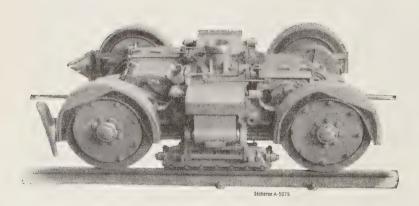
Secheron type driving bogie of motor vehicle No. 571, Rotterdam Tramways, fitted with mechanism in fig. 374 and motor in fig. 375.
